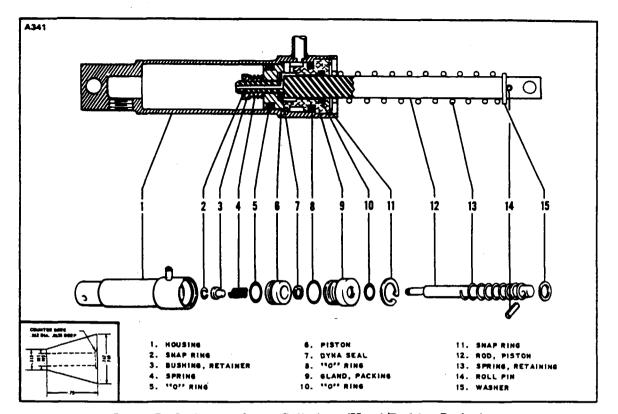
Brake Master Cylinder. (Hand/Parking Brake.)
